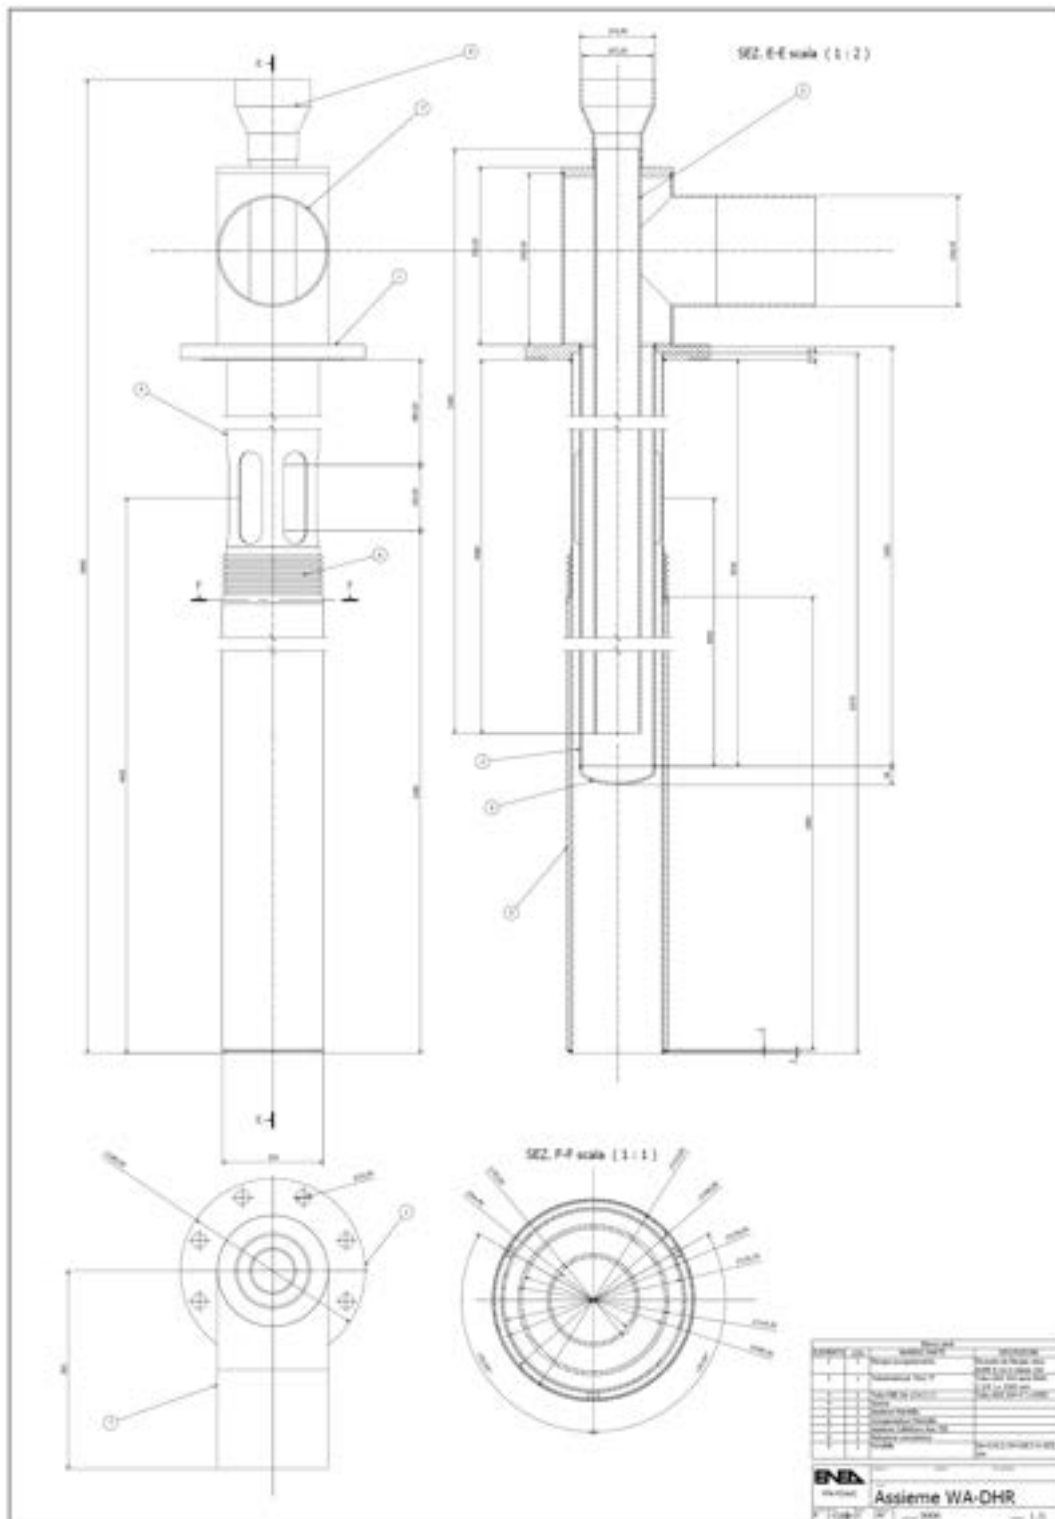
Mechanical Drawing of the decay heat removal heat exchanger
